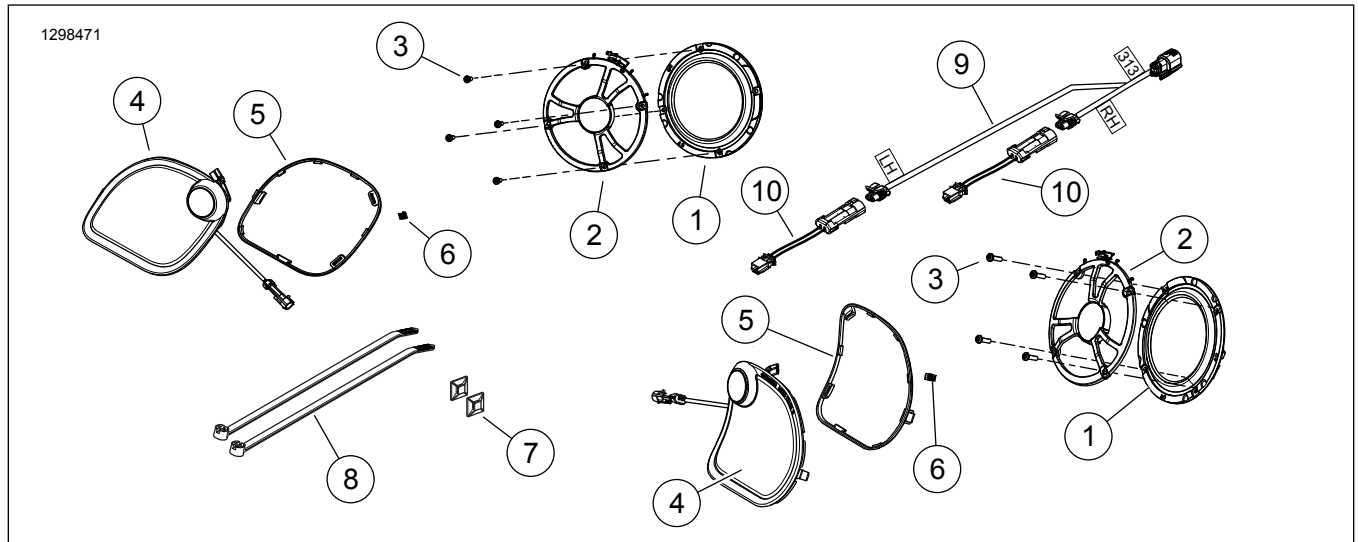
Service Parts, BOOM! Audio Stage II Fairing Speaker Kit (FLTR)
